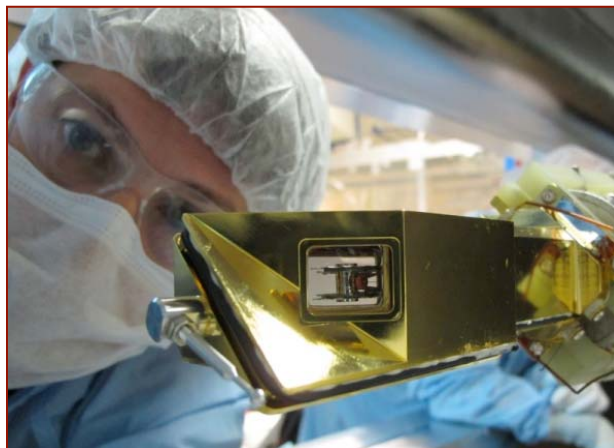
Inspection of a target encased in the I-TIC shroud.
